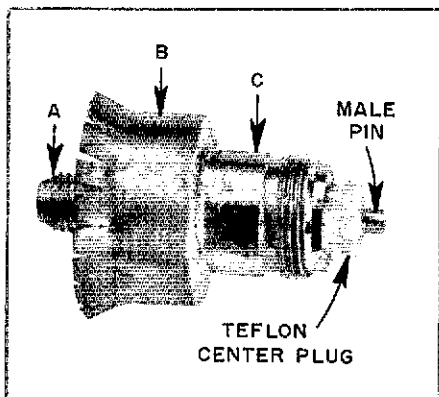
A homemade connector for use with Andrew LDF 5-50 Heliac. Refer to text for construction details. Part A is the homemade center conductor. A copper sleeve coupling is used for part B and soldered to part C, a modified UG-58 receptacle.
